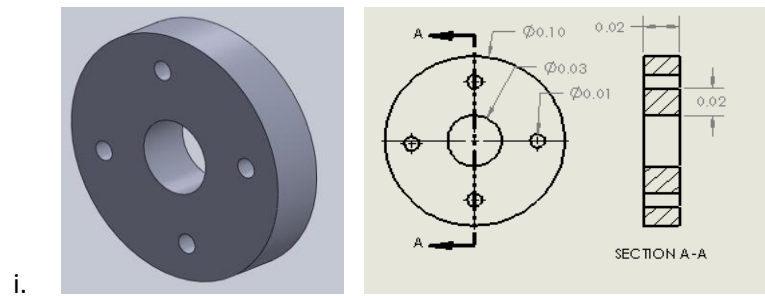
14 i) Die holder 3D, 2D and section view drawing
